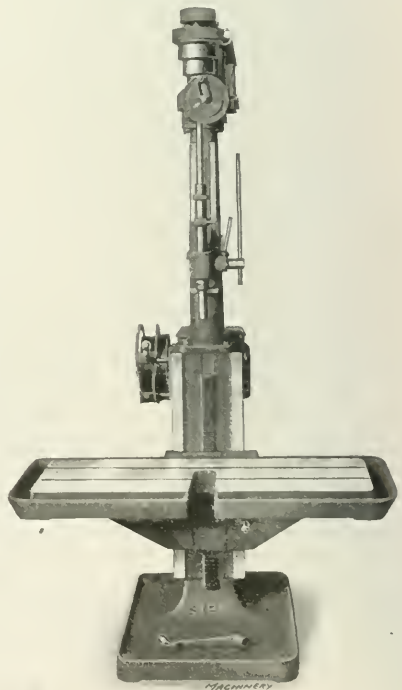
Sipp Machine for drilling Hole at Inlet End of Crankshaft Forced-feed Lubrication System
